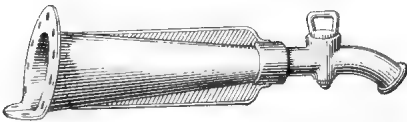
The Way to Fit Pipe, Cock and Boss.
